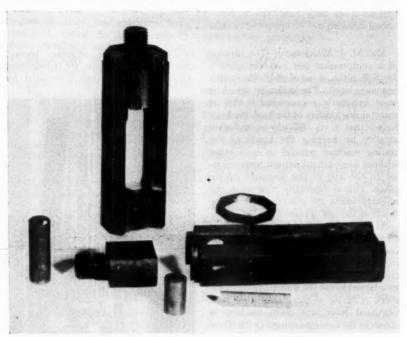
Test Specimen and Parts of Compression Fixture.
